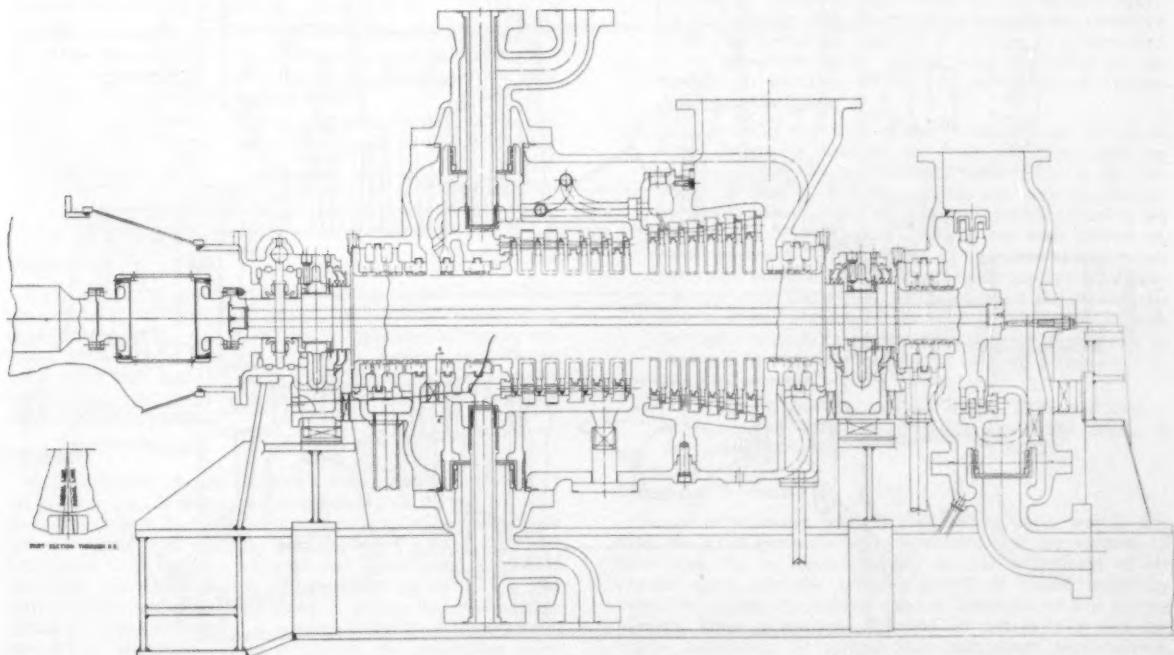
Prototype HP turbine for steam at 800 lb/sq in, 1,035 deg F, for set of 22,000 shp machinery
